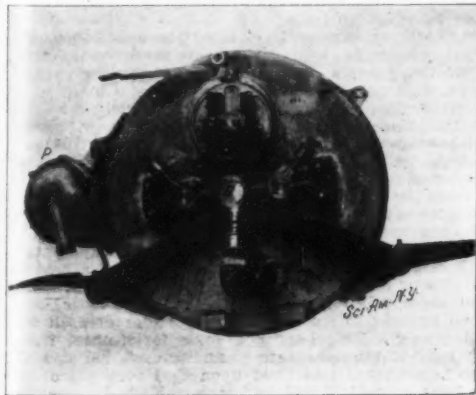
COVER OF MOTOR FLYWHEEL.
